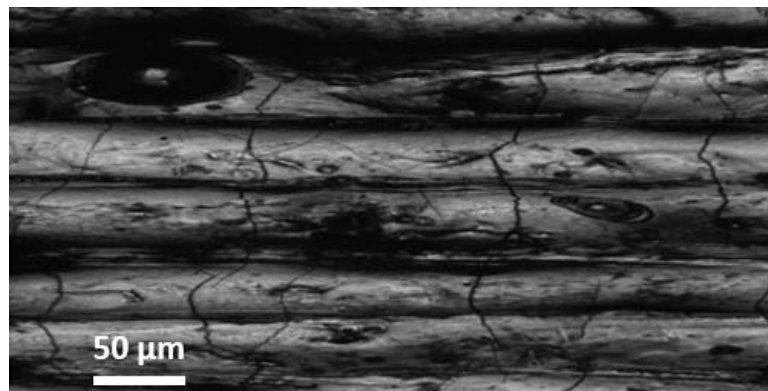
Example of cracking on pads created with single-layer Ti64.
